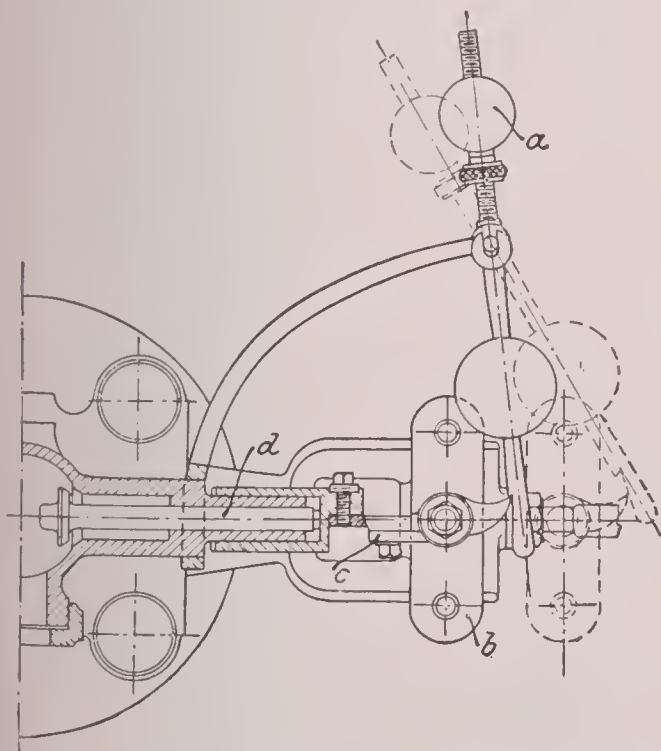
Pendulum Governor, Delamare-Deboutteville, old Type.
